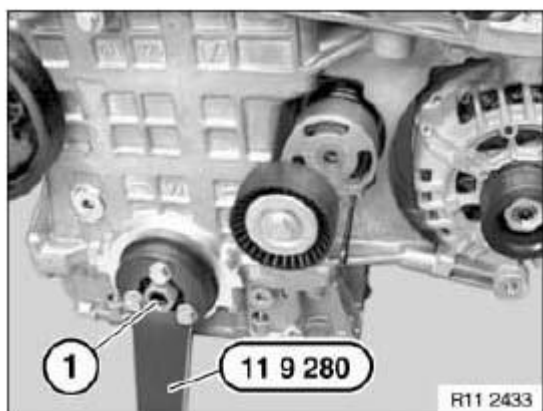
Identifying Special Tool (11 9 280) And Central Bolt
